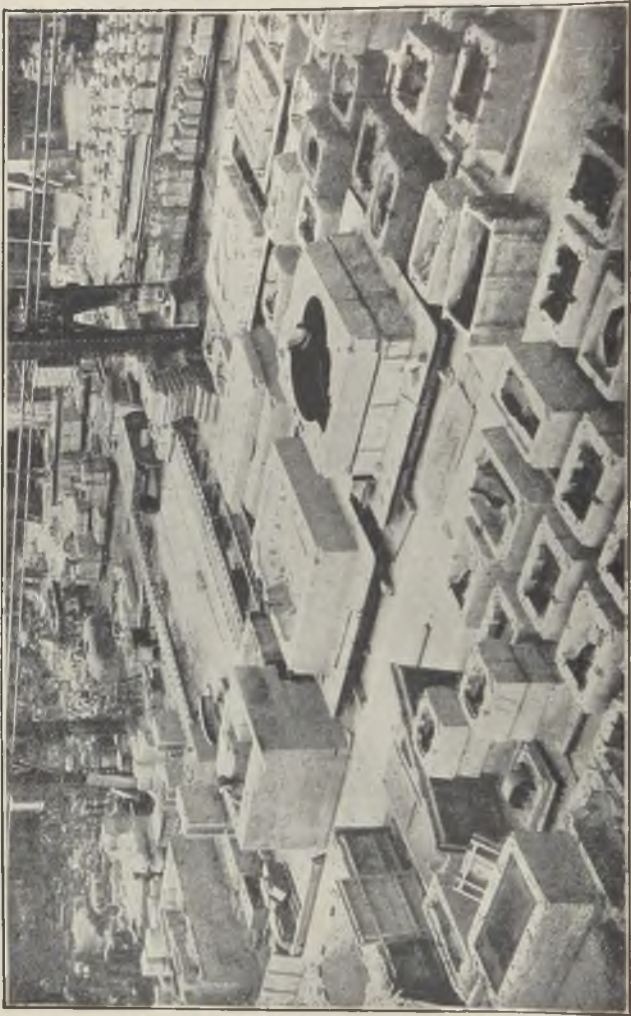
VIEW OF FOUNDRY SHOWING LARGER MOULDS FOR CAST IRON.
